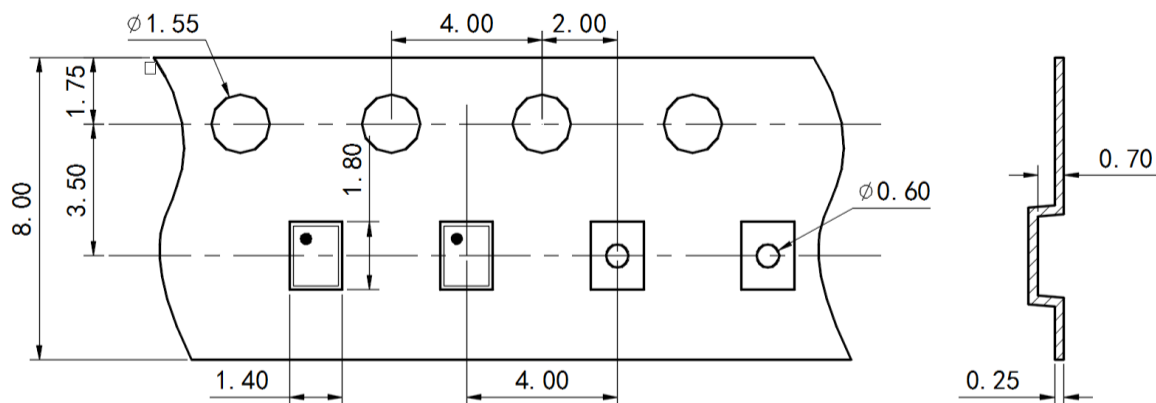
Drawing of tape with tape dimensions according above (mm.).
